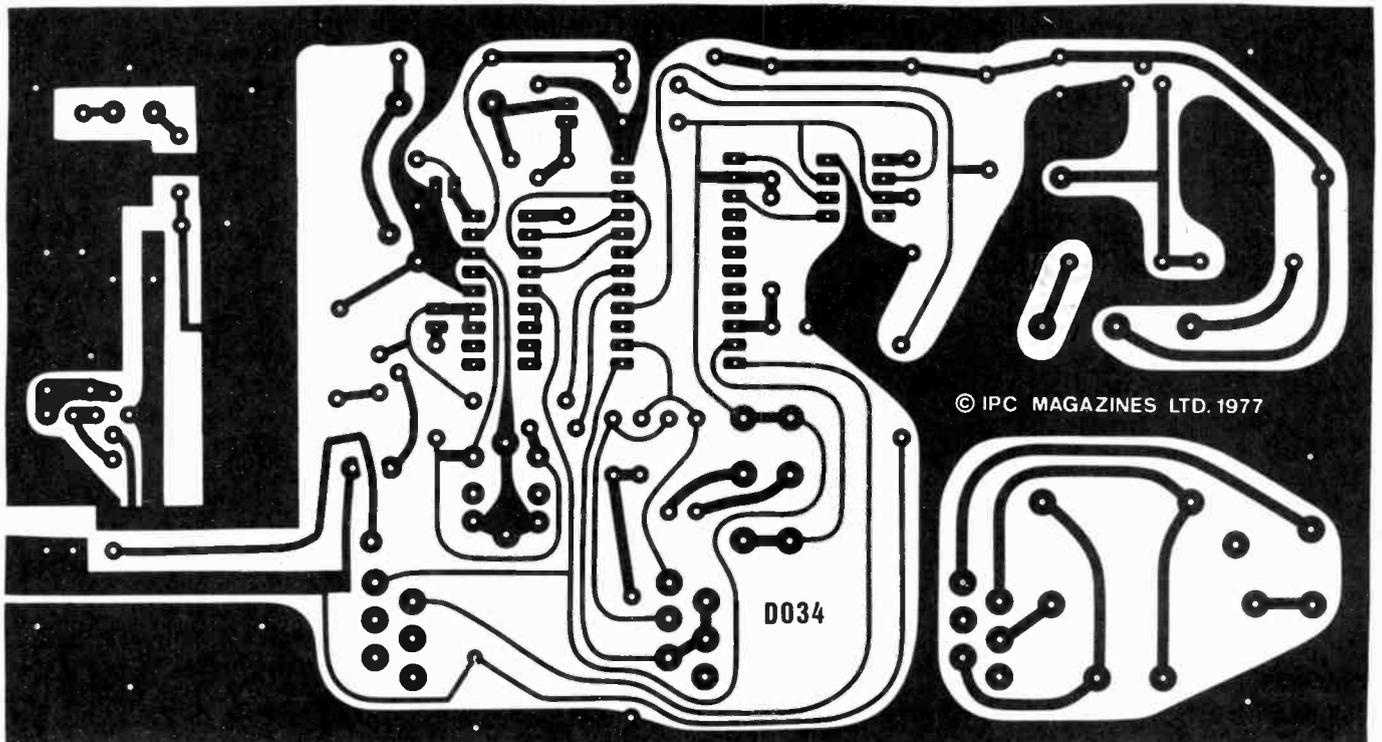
Track detail of p.c.b. The board is available from Readers' PCB Services Ltd.
